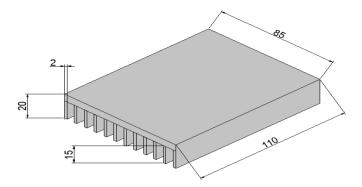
Rectangular heat sink. (all dimensions are in mm)
